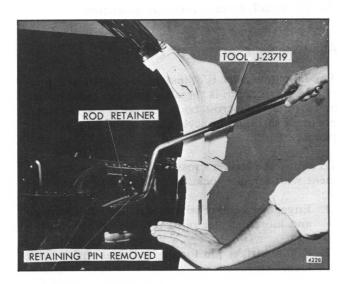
Torque Rod Tool - Torque Rod Release or Adjustment
